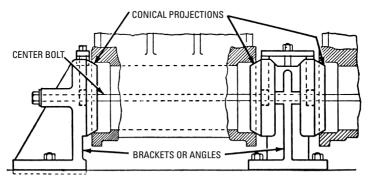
A fixture used to hold locomotive cylinders in position for planing the surfaces of the saddles.
